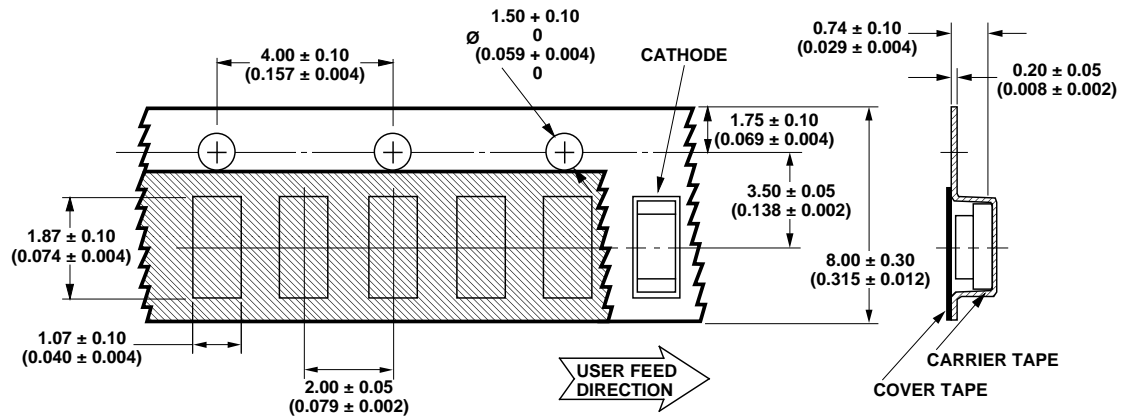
Tape Dimensions, HSMx-H690/H790 Series.
